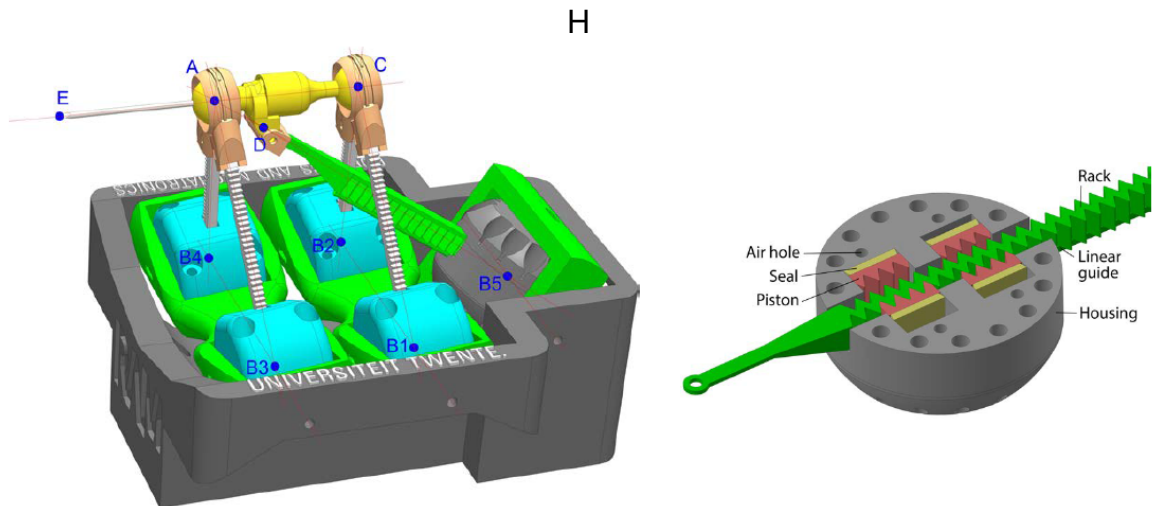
Left: Stormram 3. Right: T-49 pneumatic stepper motor
